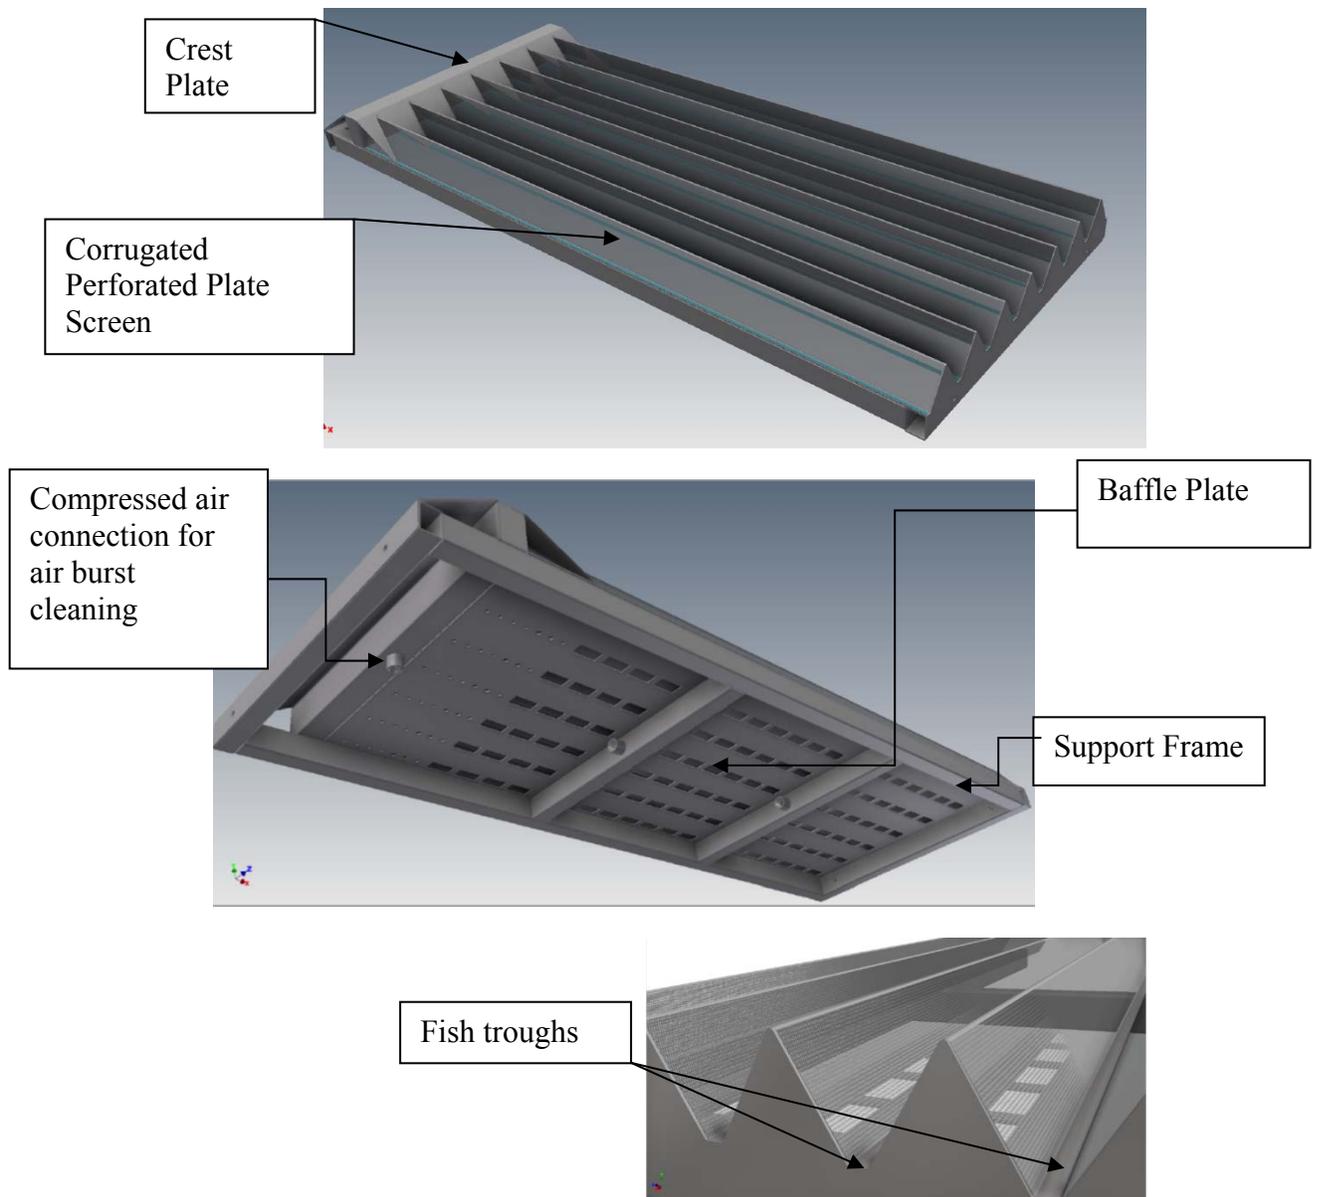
Three dimensional CAD renderings showing the screen, baffle plate, support frame and fish troughs.
